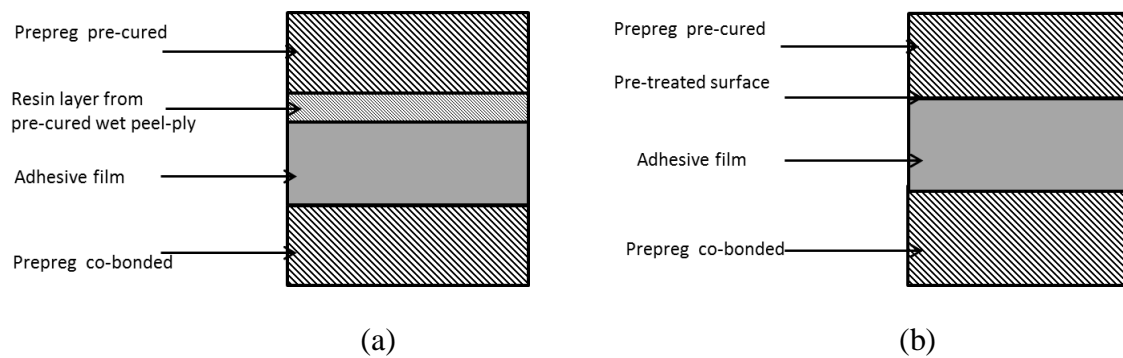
Materials used in a co-bonded adhesive joint: (a) with removal of wet peel-ply (b) with removal of dry peel-ply, sanding or grit blasting.
